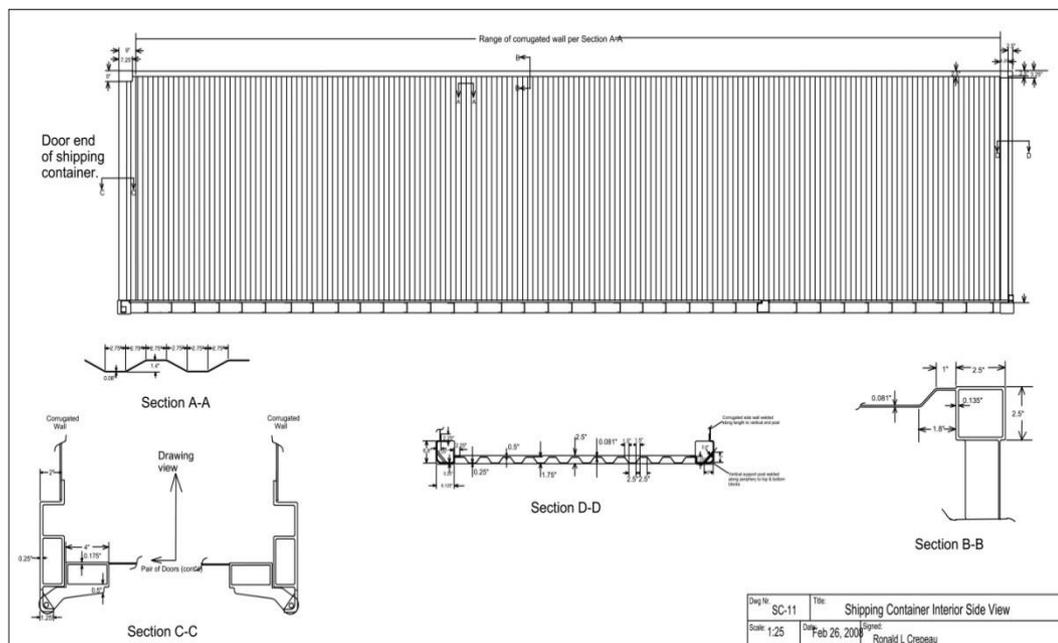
Side Wall Details of ISO 40' Shipping Container (Crepeau R. 2008)
